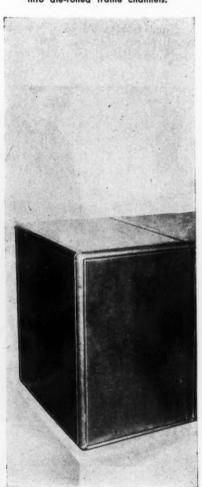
Close-up of Lindsay Struc-Lok assembly, showing how die-formed edges of panel sheets lock permanently into die-rolled frame channels.
